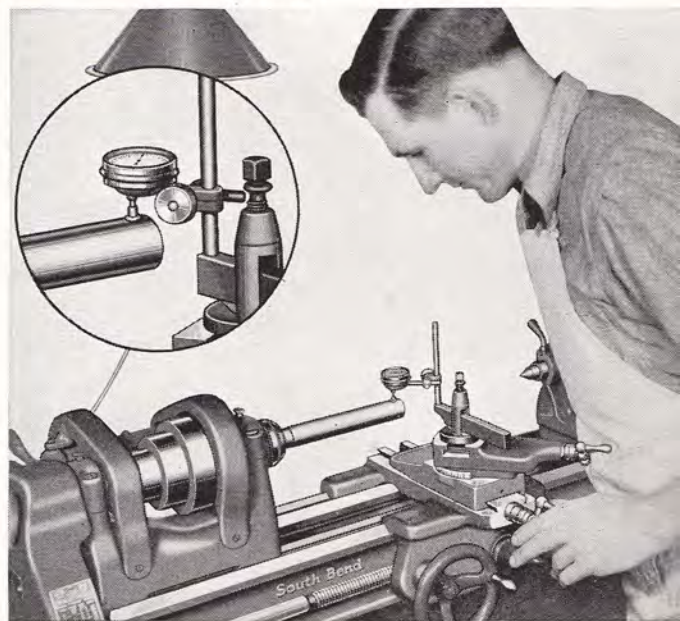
Testing Alignment of Headstock Spindle with V-ways of Lathe Bed.
